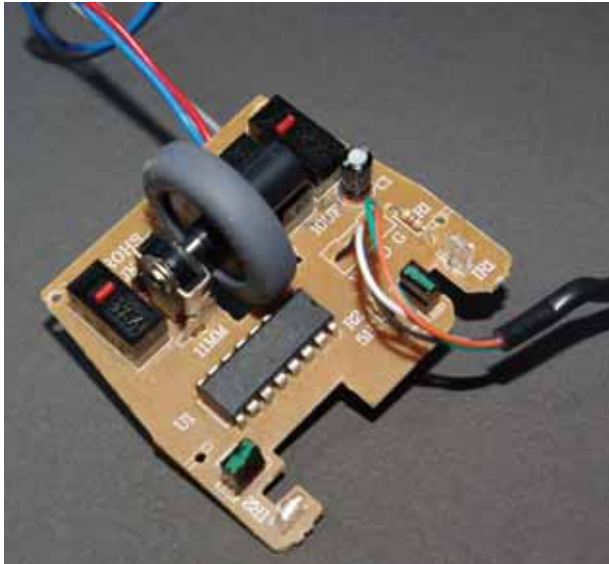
Internal PCB from a conventional roller ball mouse showing the scroll wheel sensor (to be removed).
